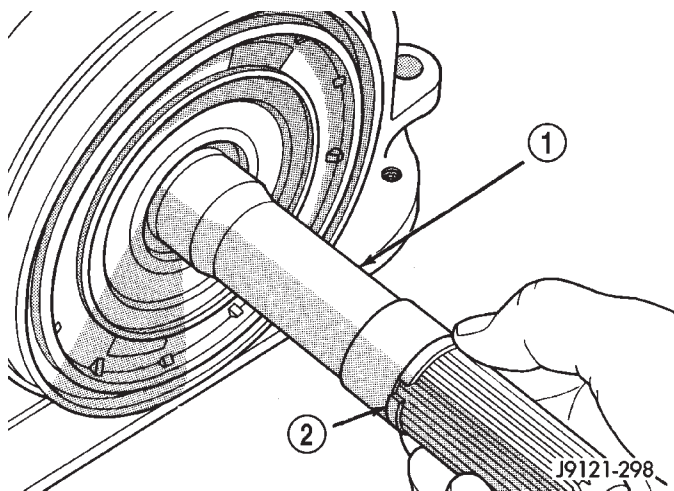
Overdrive Piston Thrust Plate Removal
